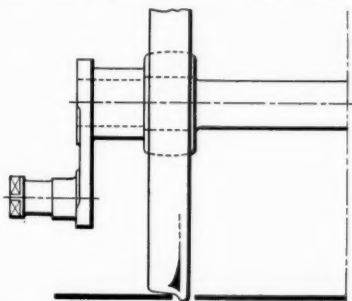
Flycrank attachment to axle on a 3-ft. gauge locomotive
